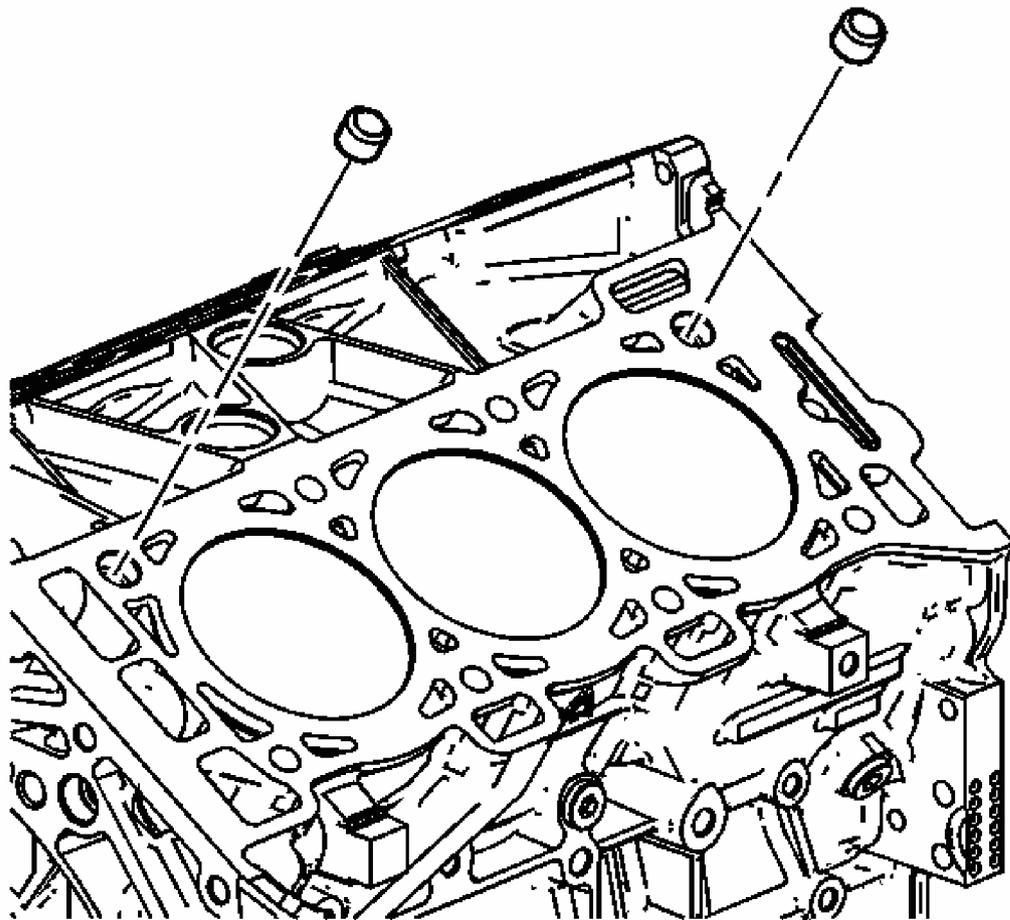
Cylinder Block-To-Cylinder Head Alignment Dowels
